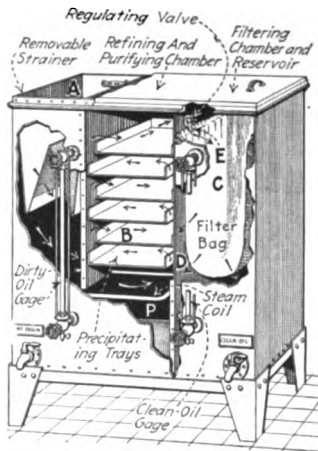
Oil filtering outfit. (S. F. Bowser & Co., Inc.)
